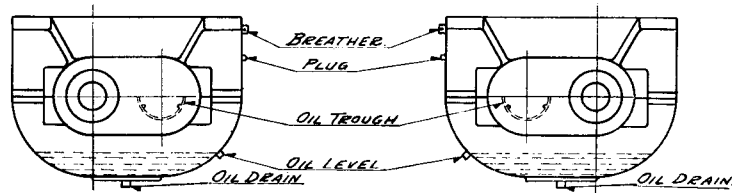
R. H. UNIT, CEILING MOUNTED (SPECIAL)
